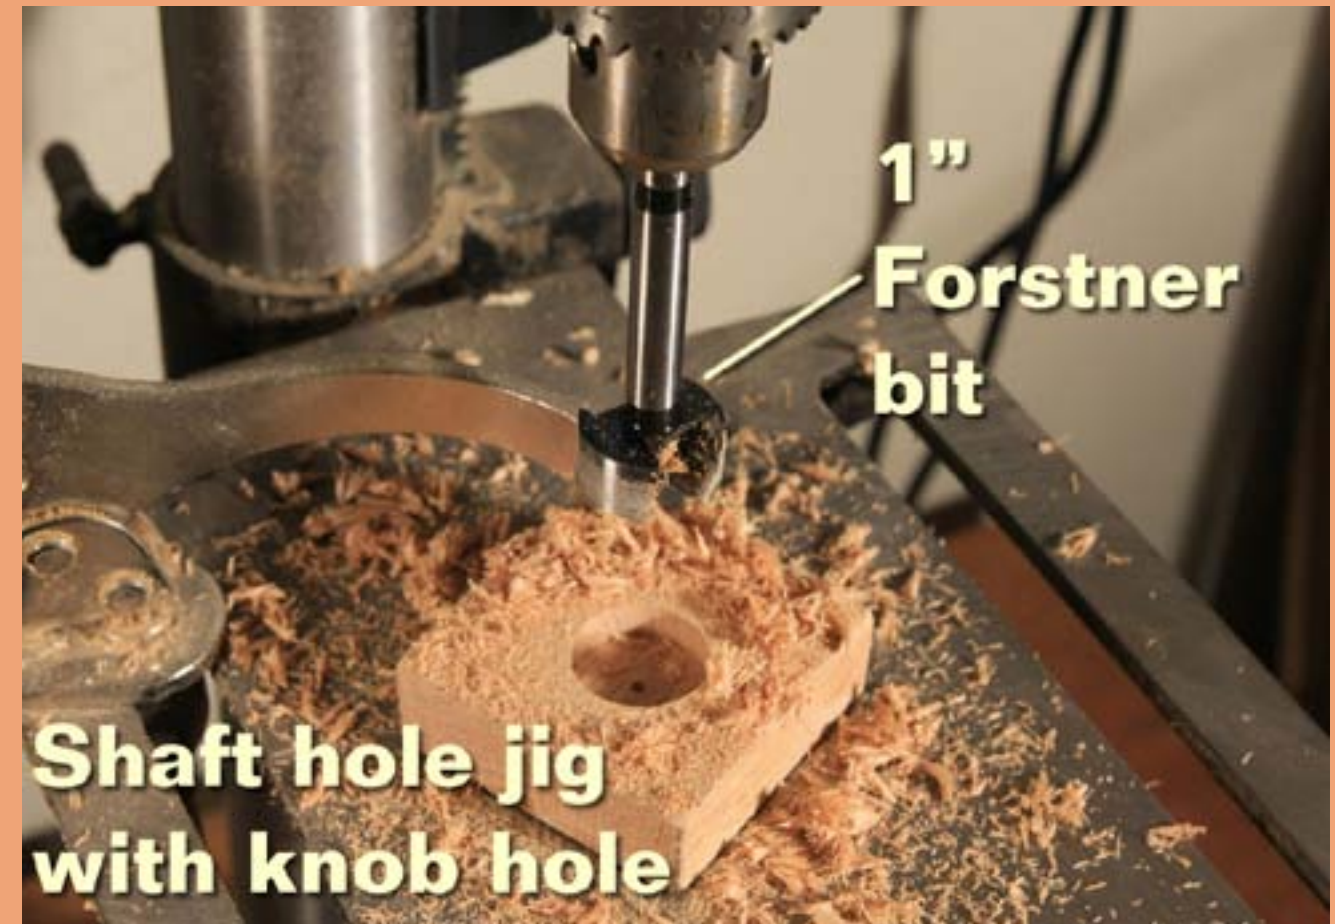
Shaft Hole Jig - drilling the hole to hold the knob.
